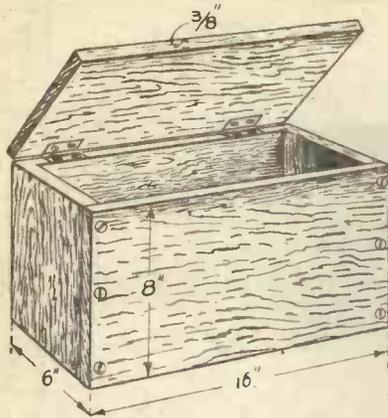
How to make the cabinet. The front panel carries the component parts.
